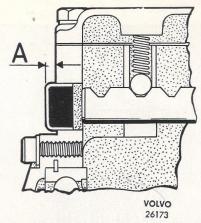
Fitting end cap over selector rail A = approx. 4 mm (0.16")
